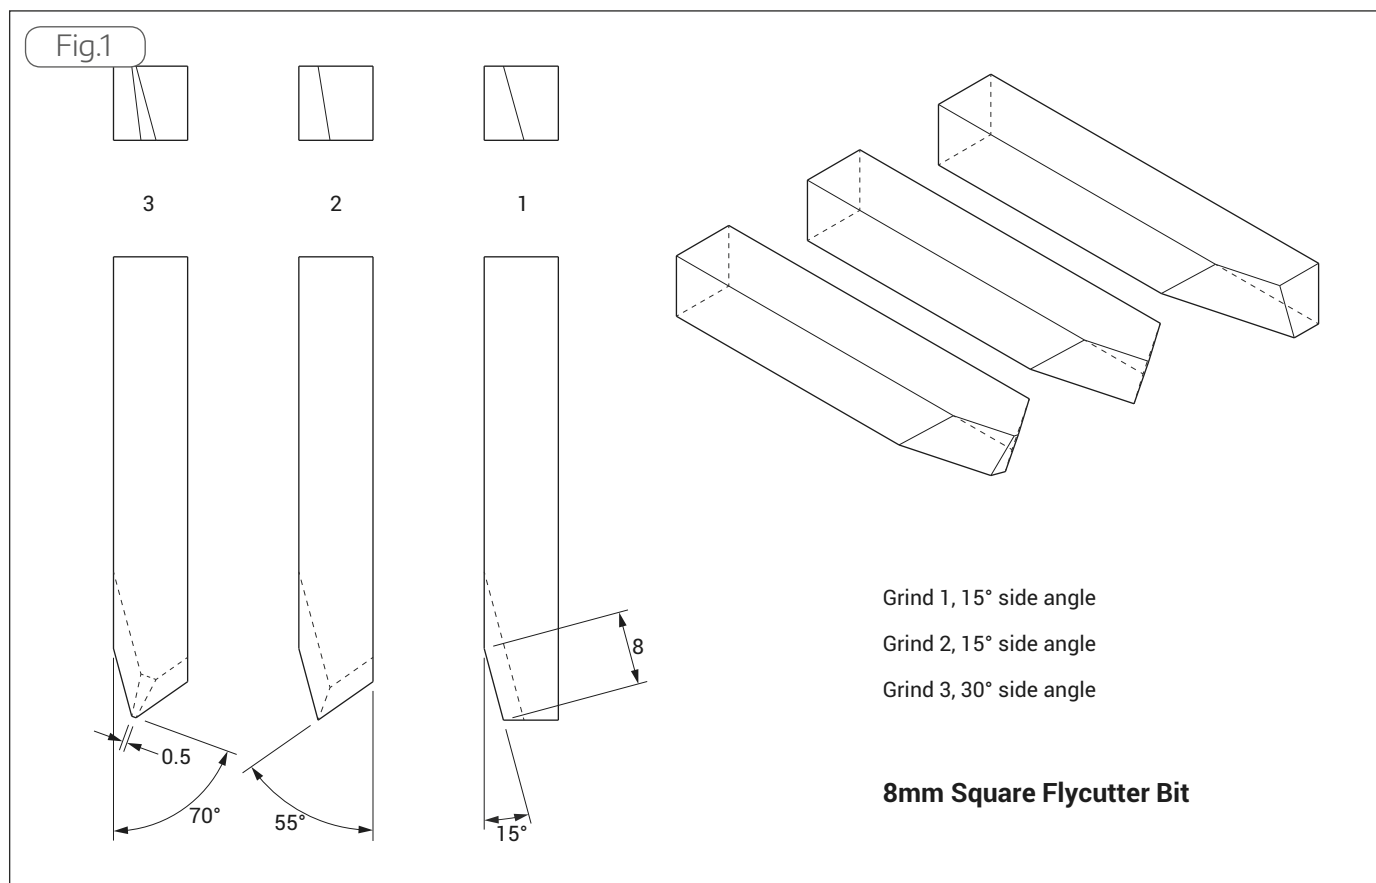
shows the typical angles to grind a toolbit suitable for use in a 63.5mm fly cutter which is also shown in photo 85, the main thing to watch is that the back of the tool does not rub against the cut, so this may need to be altered if using a smaller diameter flycutter. As shown on the drawing with the small angled corner it will
